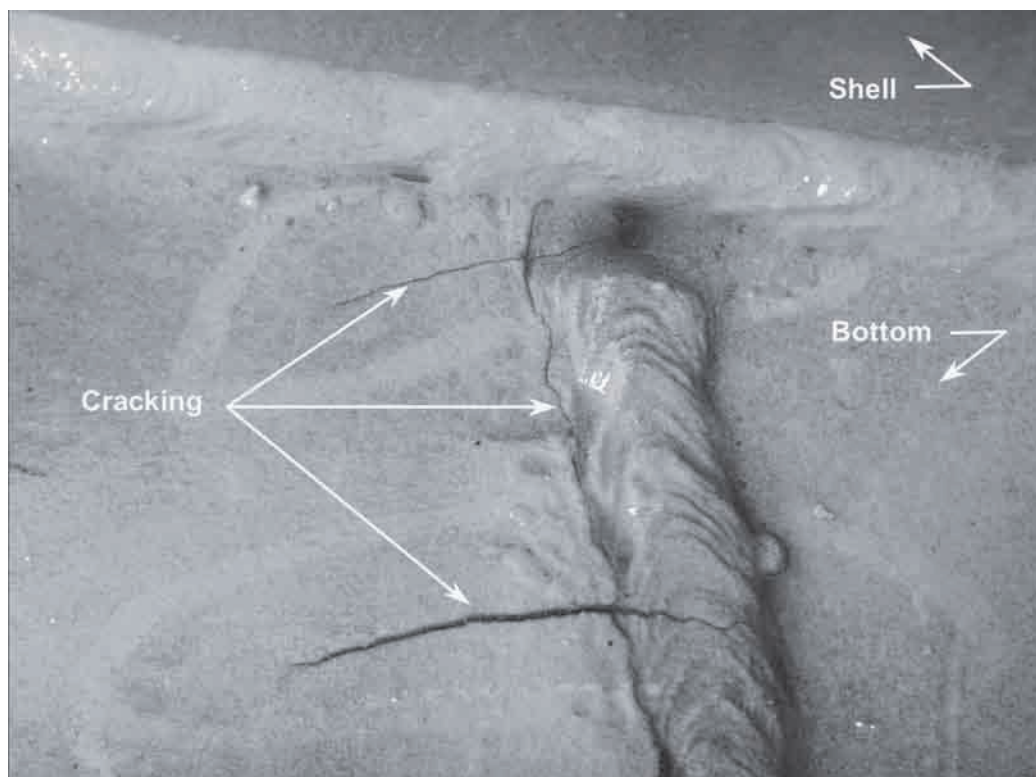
Cracks in Bottom Plate Welds Near the Shell-to-bottom Joint
